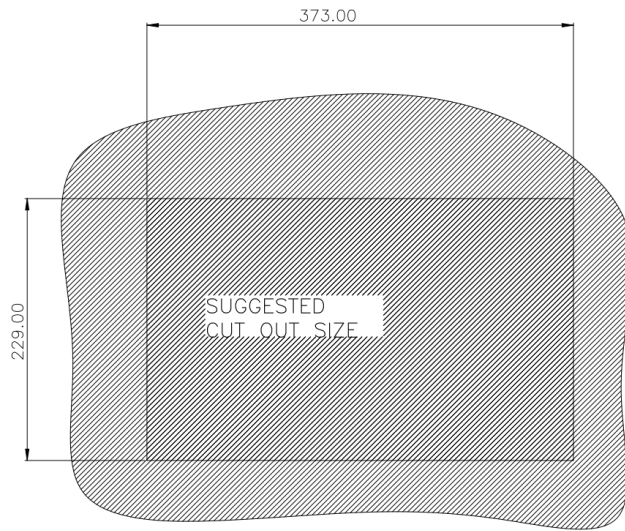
AURA-W156-RK3576 Panel Cutout Dimensions
